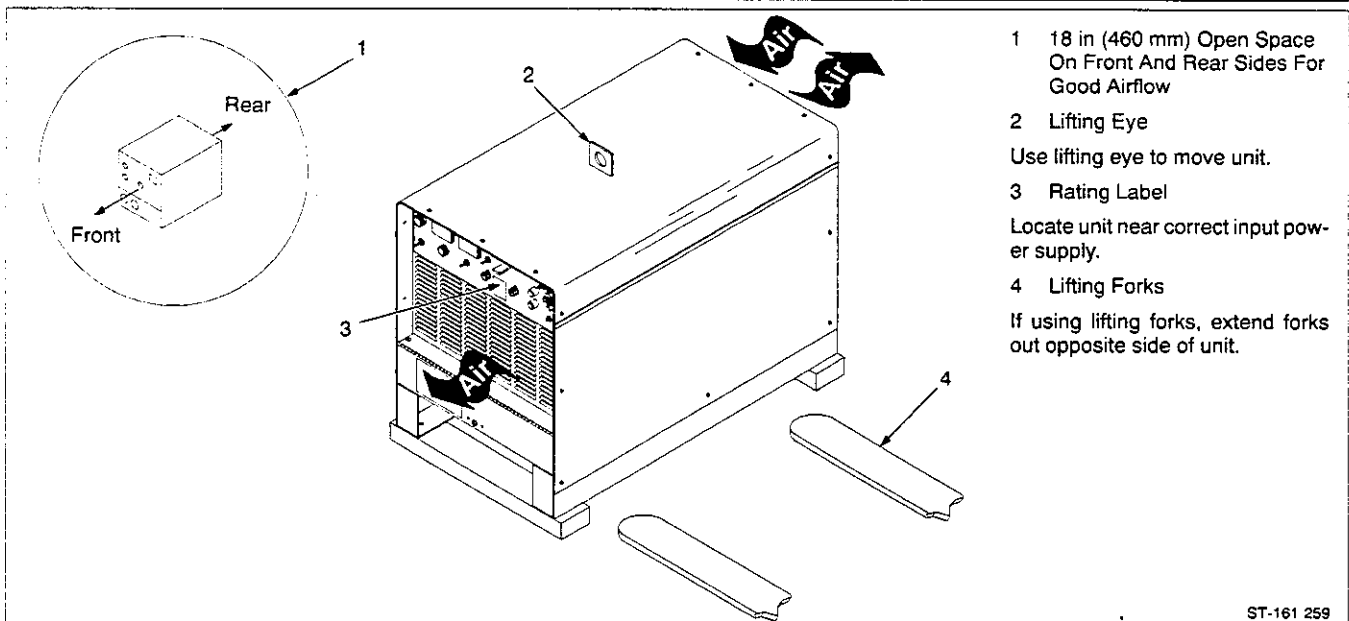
Location and Movement Of Welding Power Source
